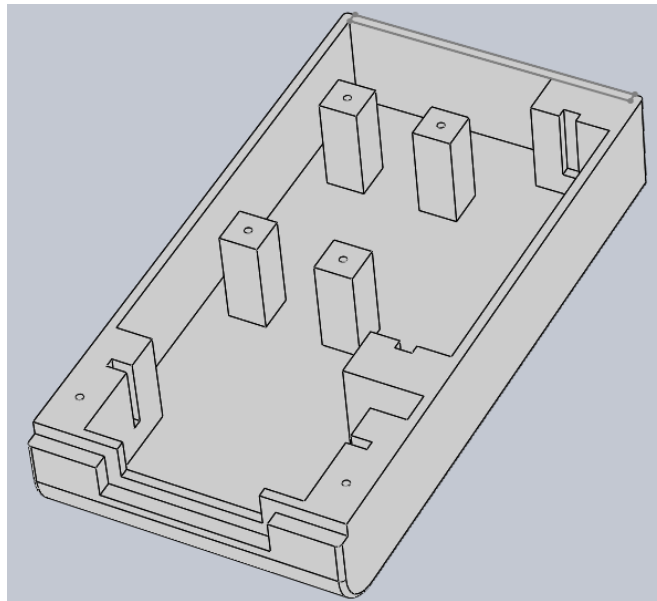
UnTape Wand 1st Gen Bottom Section
